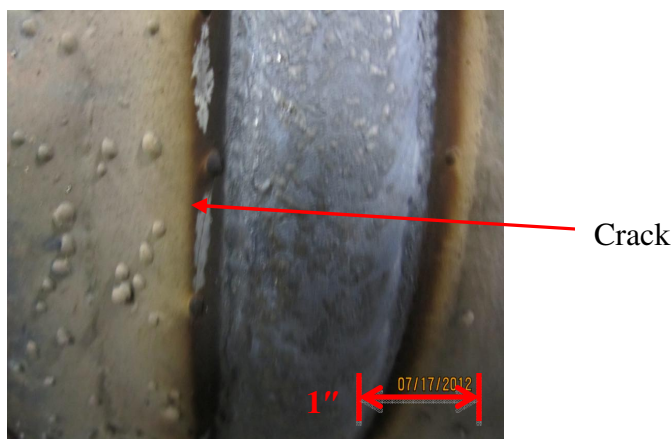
Cracking occurring between weld beads during processing<sup>5</sup>.
